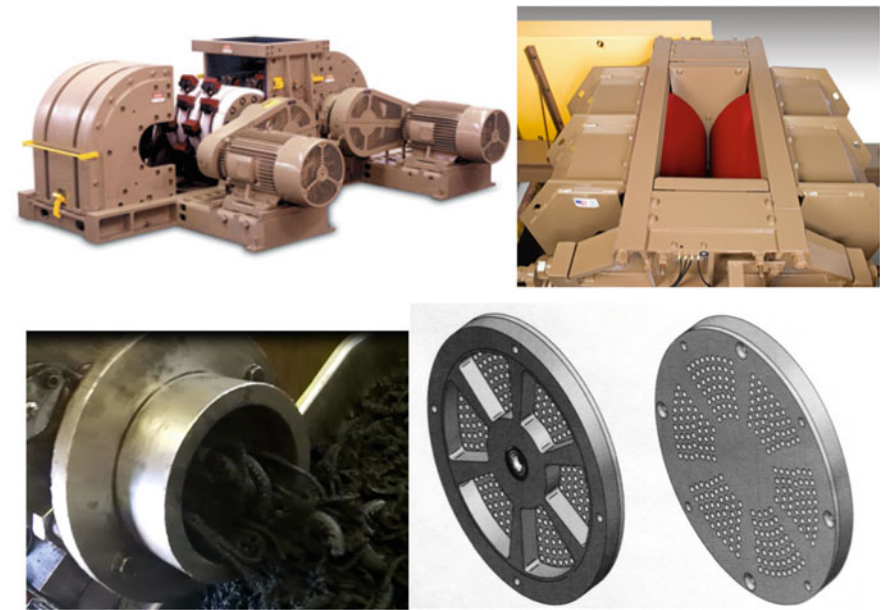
Equipment and tools for materials pulverization (top left—hammer mill; top right—roller crusher; bottom left—shearing through the shearing plate of extruder; bottom right—shearing plate)
